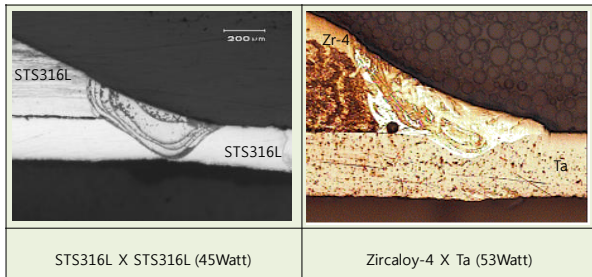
Macro-sections of the STS/STS and Zr-4/Ta welded specimen.
